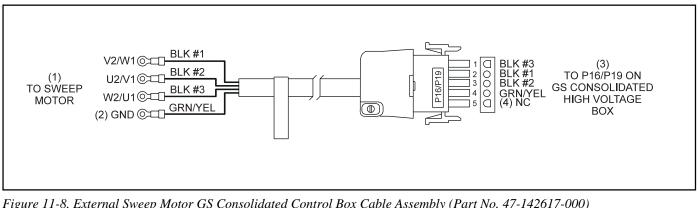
External Sweep Motor GS Consolidated Control Box Cable Assembly (Part No. 47-142617-000)
